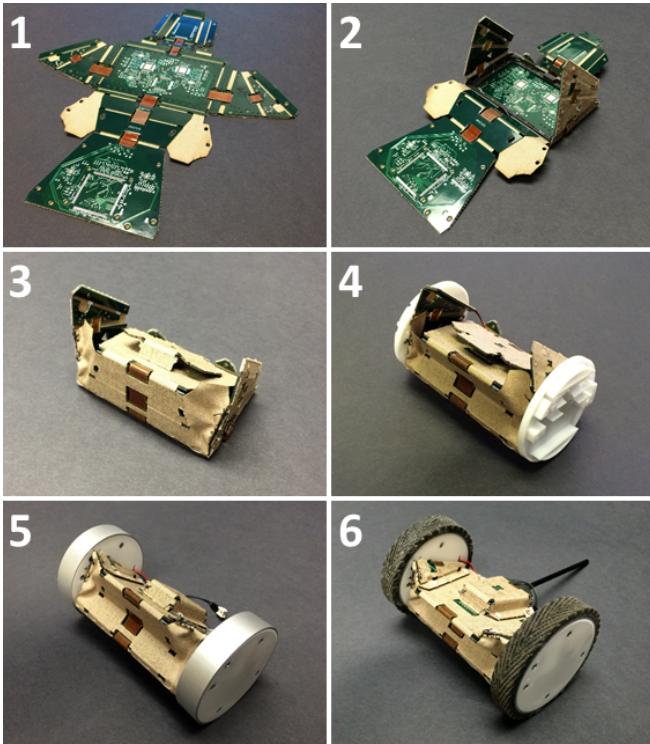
Assembly of latest rigid-flex PCB into PUFFER prototype. Images show: (1) flat rigid-flex PCB prior to assembly; (2) attachment of base frame and return springs; (3) stitching of textile flaps; (4) attachment of wheel housings; (5) assembly of complete wheels; and (6) closing of structure with plastic rivets.
